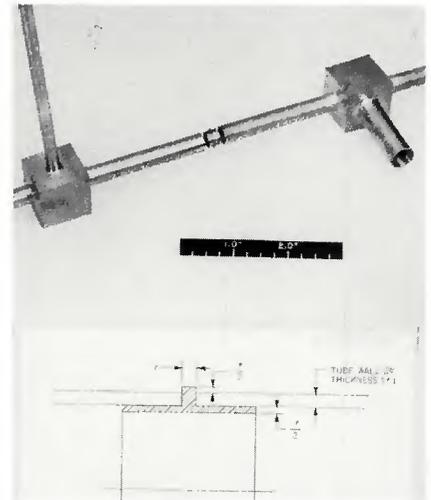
(Top) Molybdenum tees with attached tubes and insert in position before assembly for welding. (Bottom) Design of typical insert for 0.250, 0.275, and 0.500 in. OD tube-to-tube welds
